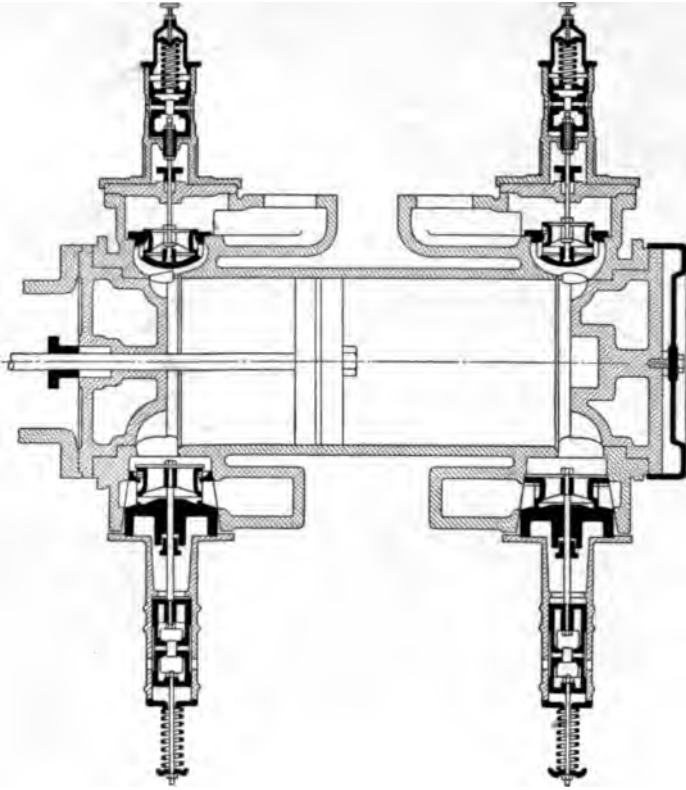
Section of Nordberg poppet-valve engine cylinder.
